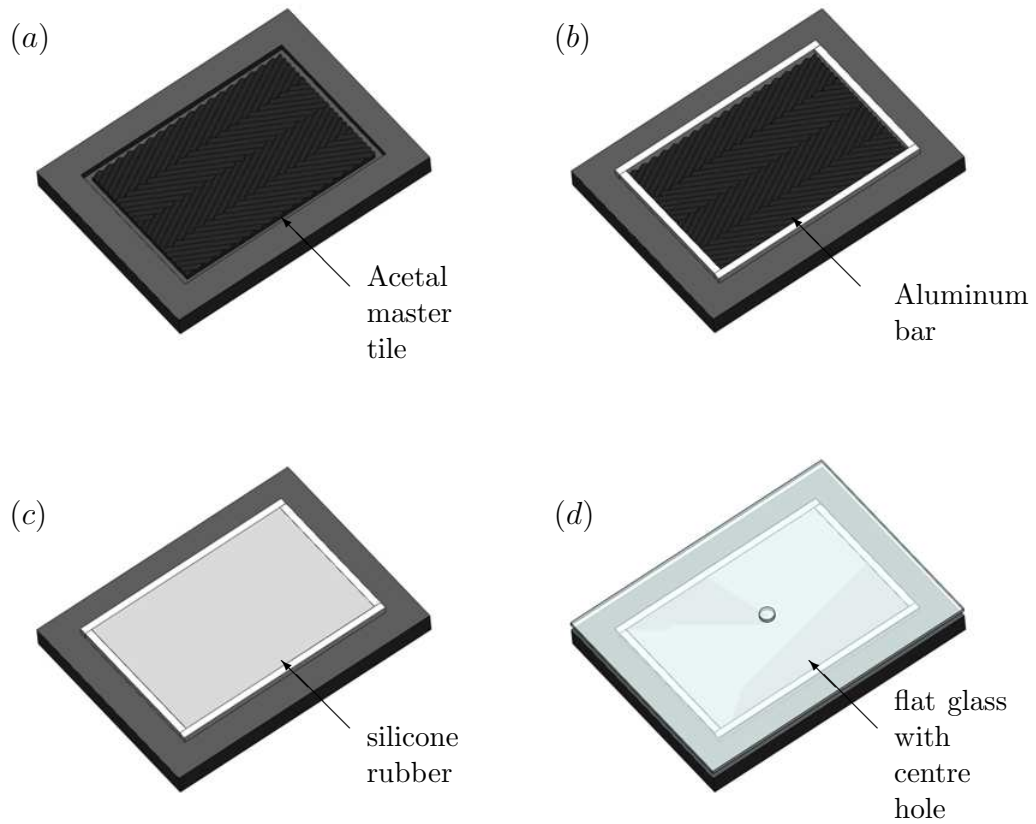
Moulding methods: (a) acetal master tile, (b) aluminum bar surrounding the master cut, (c) silicone rubber poured onto the master cut, (d) flat glass with centre hole pressing the master cut.
